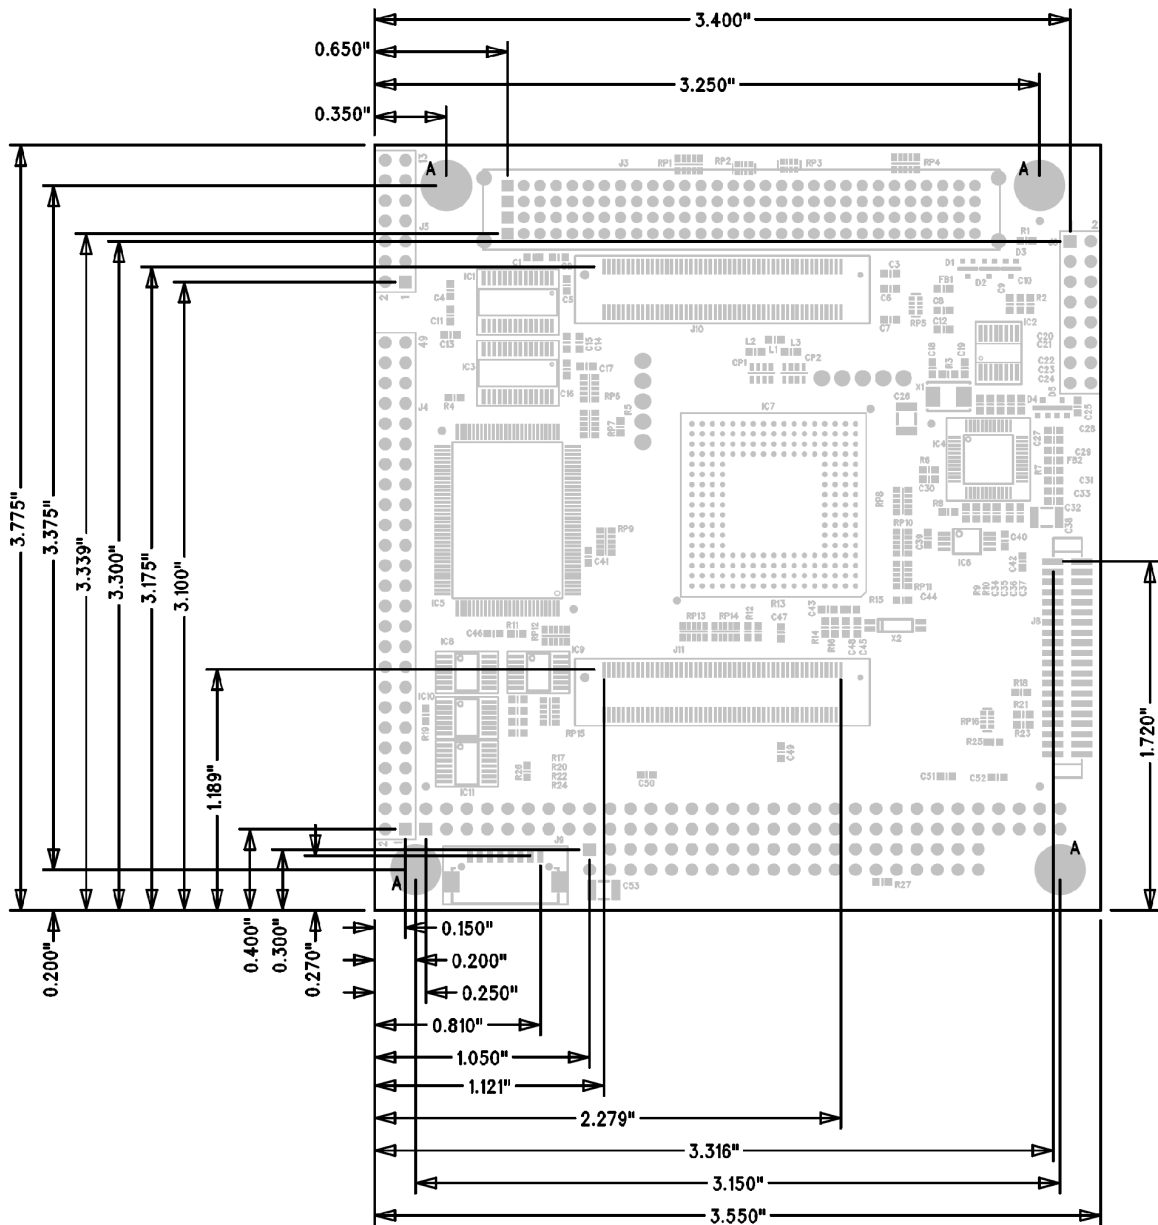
BOTTOM BOARD, BOTTOM SIDE COMPONENT PLACEMENT
